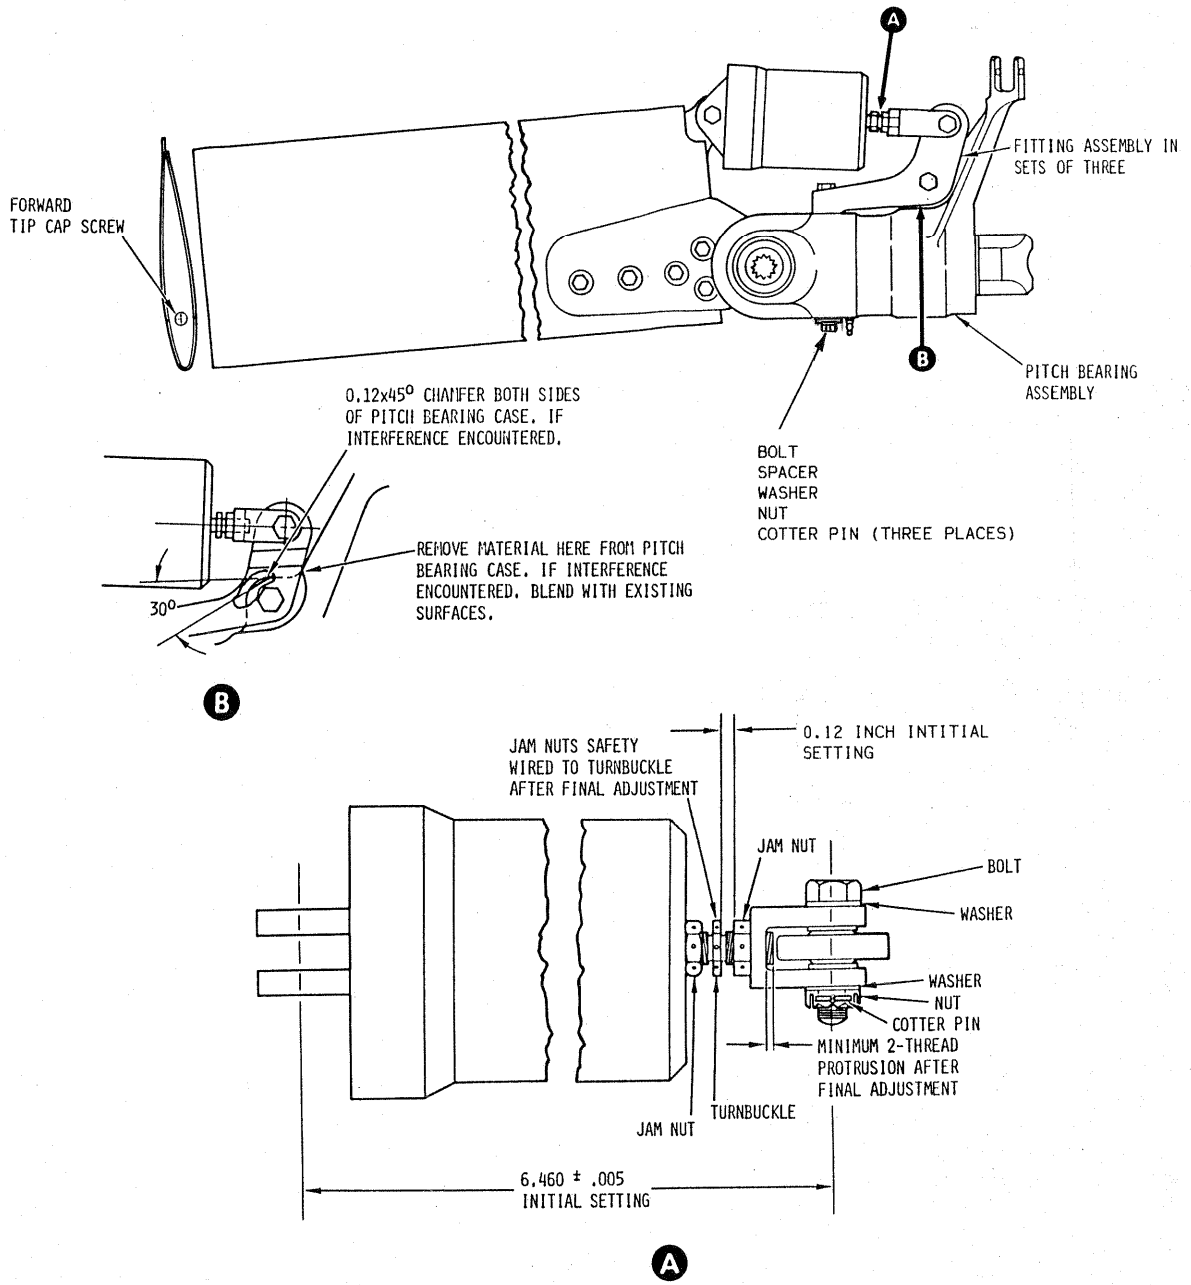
Phasing Main Rotor Blades with Elastomeric Dampers Installed
